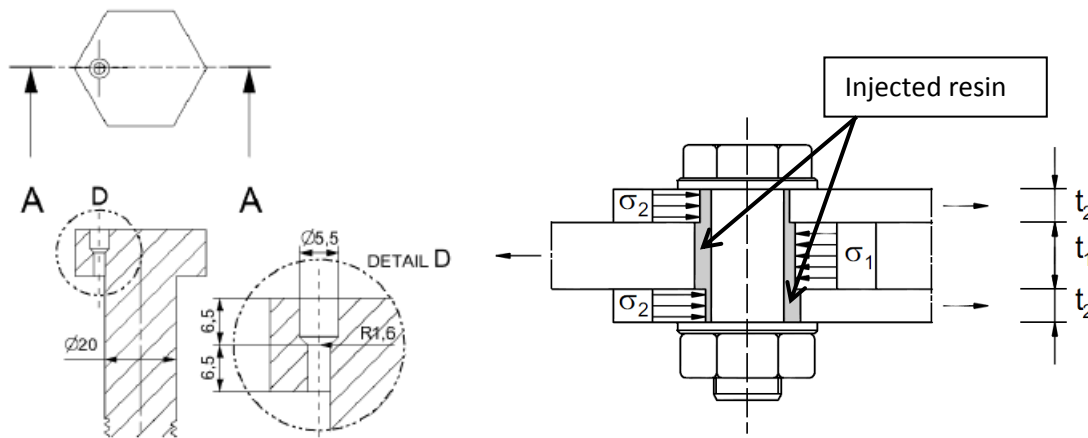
Diagram of an M20 bolt with channel for resin injection (left) (Nijgh, 2017) and bearing stresses being developed in a double lap joint due to the resin injection (right)
